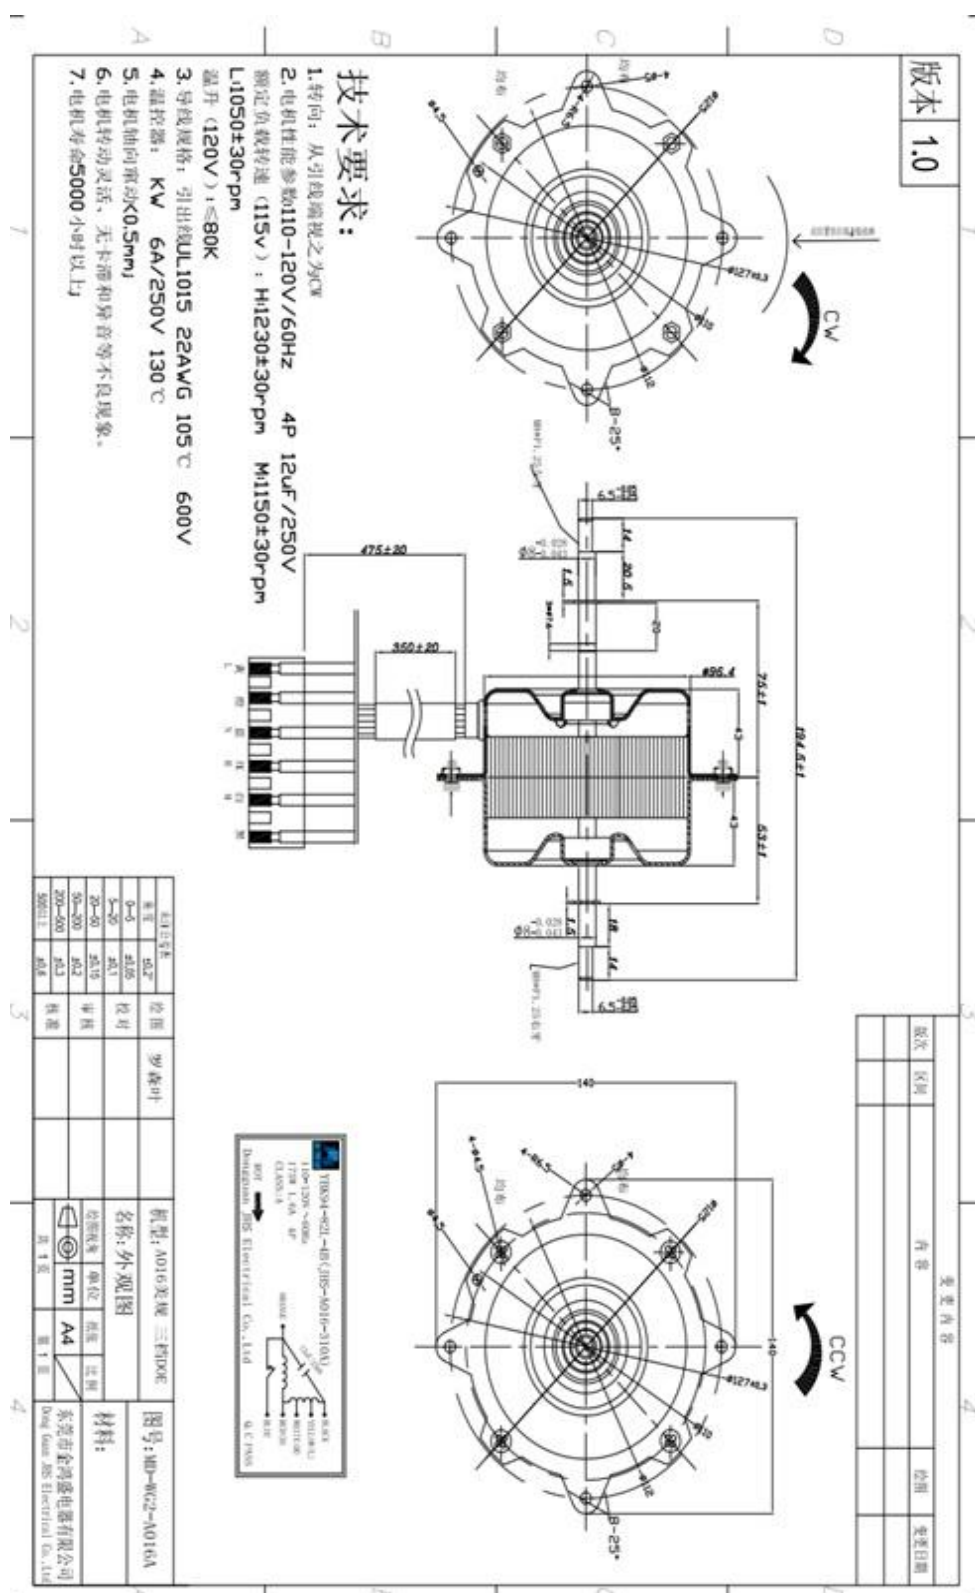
Condenser and evaporator fan motor Drawing YBK94-82L-4B(Alternative)
